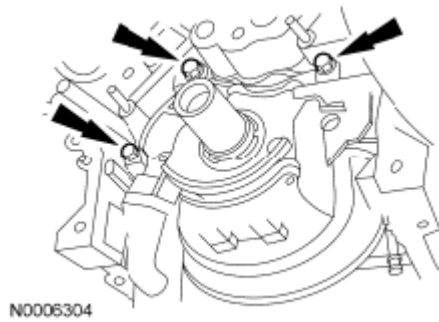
Locating Oil Cooler Mounting Bolt And Oil Cooler
